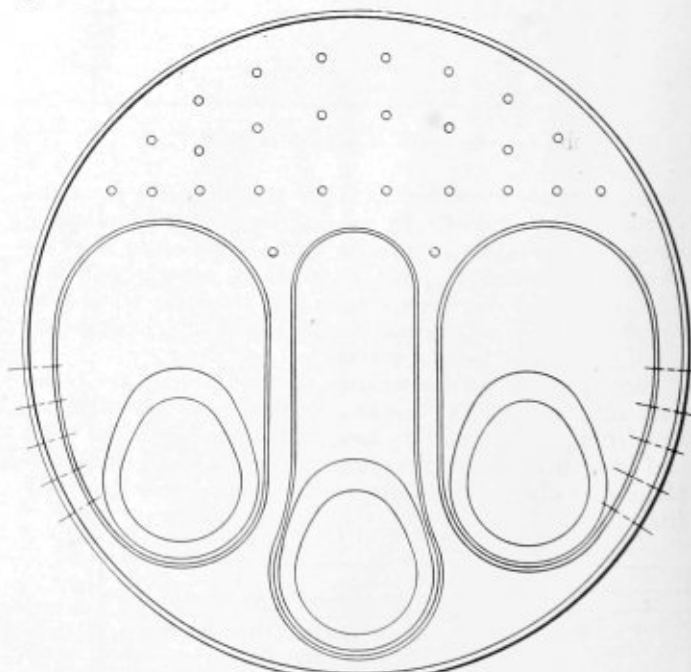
Improved Combustion Chamber Top as Designed for New Type Welded Boiler Construction
